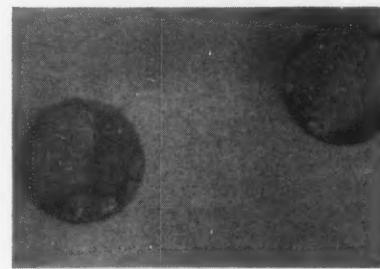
Typical corrosion fatigue failures. Magnified 40X.
